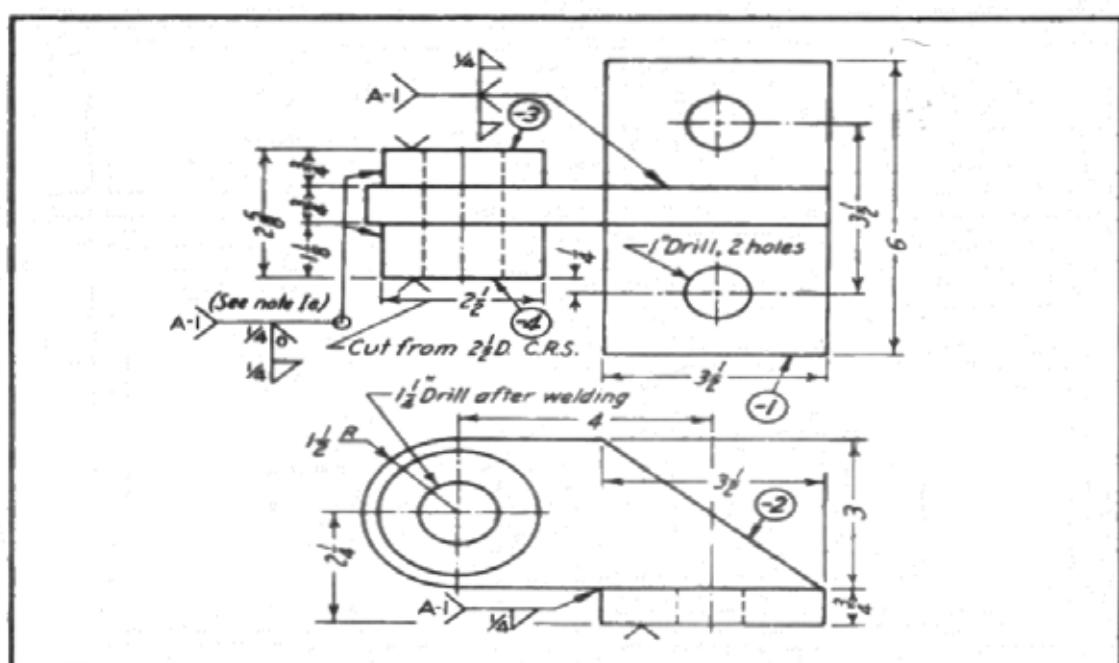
Detail drawing of a welded part. Compare with cast part.
